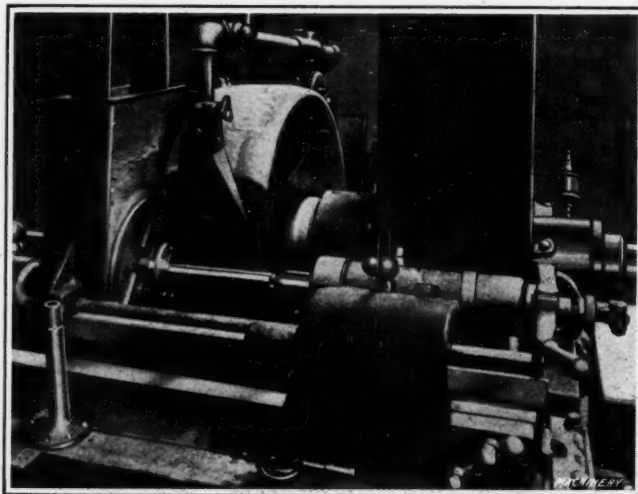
Set-up on a Special-purpose Norton Plain Grinding Machine for form-grinding a Ford Transmission Shaft
